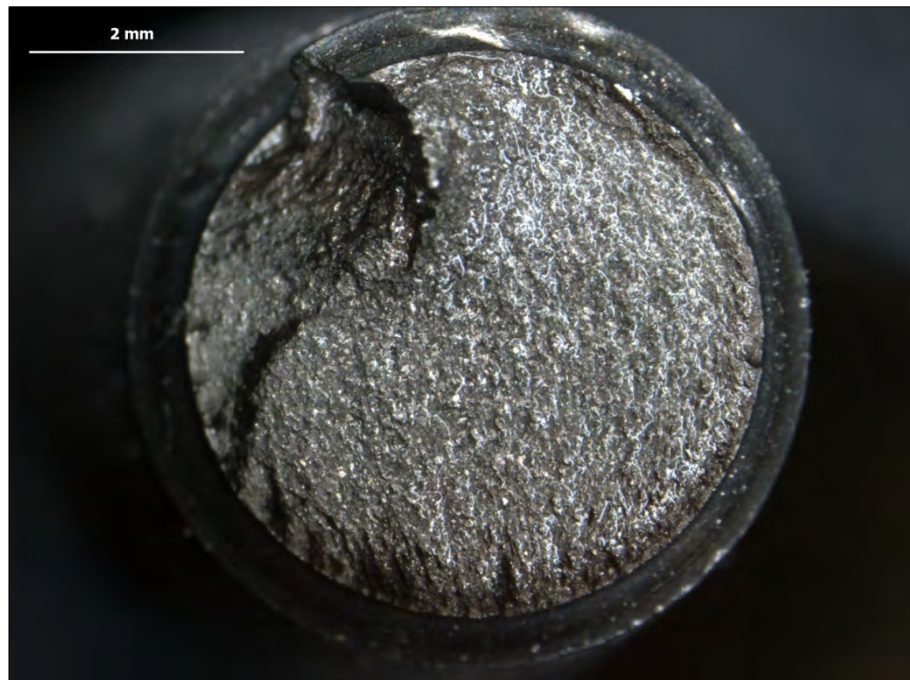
Shank of a fractured bolt showing the typical score mark 2mm from the under-head fracture
